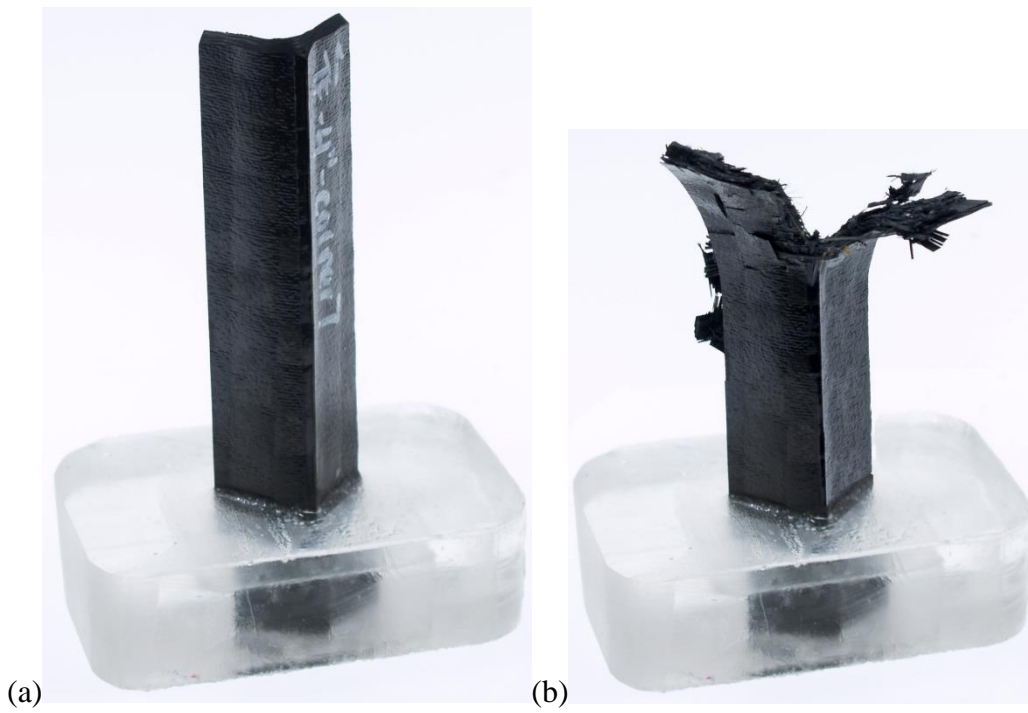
Small corner, specimen IV, (a) before and (b) after crush testing.
